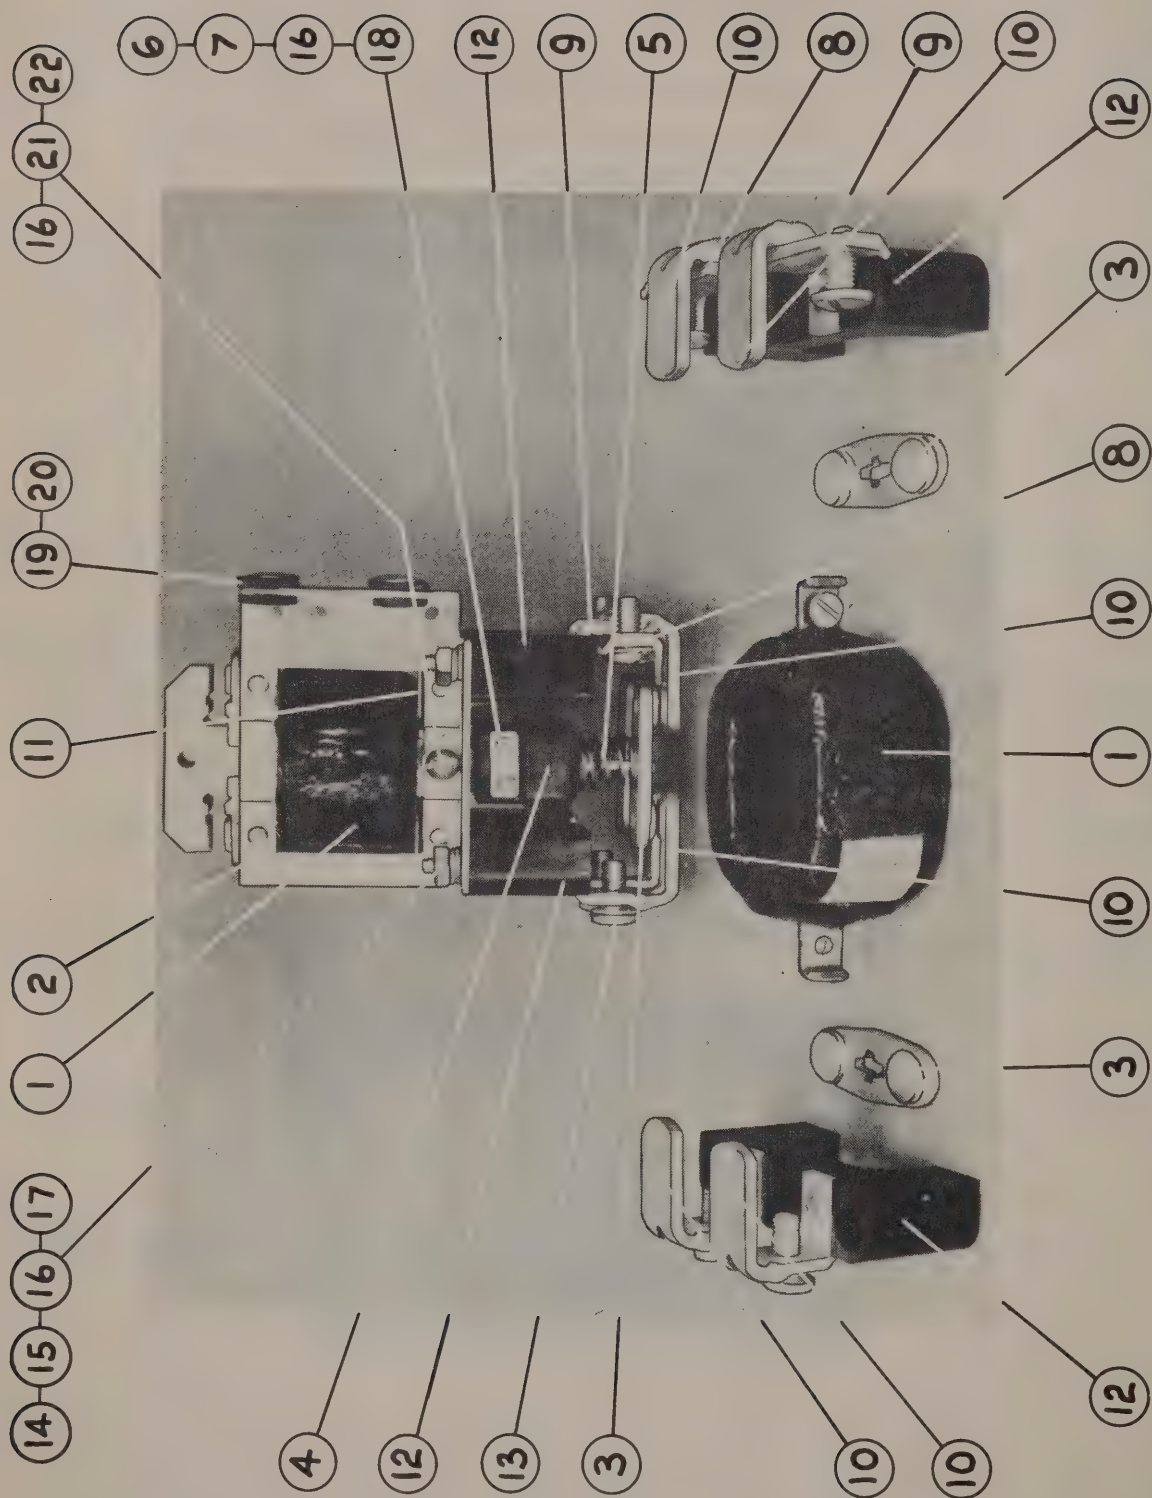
ALLEN-BRADLEY COMPANY RELAY ASSEMBLY (K4-B, K8-B)
